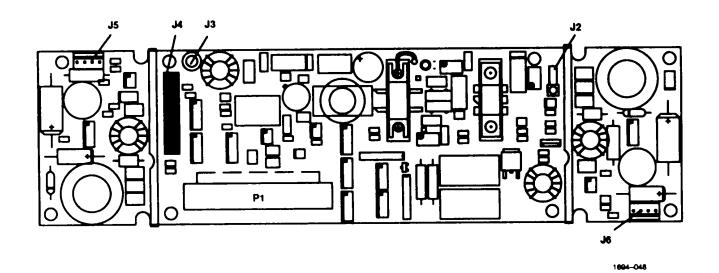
A8A1 Power Amplifier /Battery Charger PWB Assembly Component Location Drawing (10303-2130 Rev. C)
